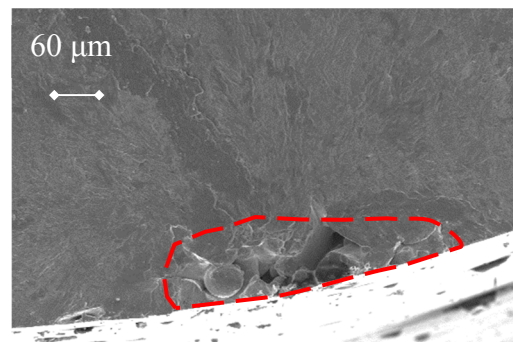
Examples of fracture surfaces relevant to the test series EN_90°_T and relevant $\sqrt{\text{area}}$ at the failure origin.
